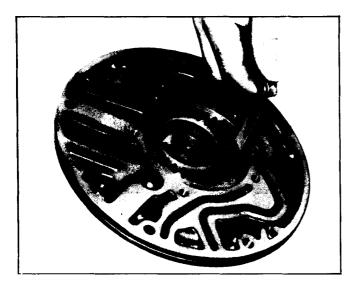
F-64 Checking Driven Gear-To-Pump Crescent Clearance
